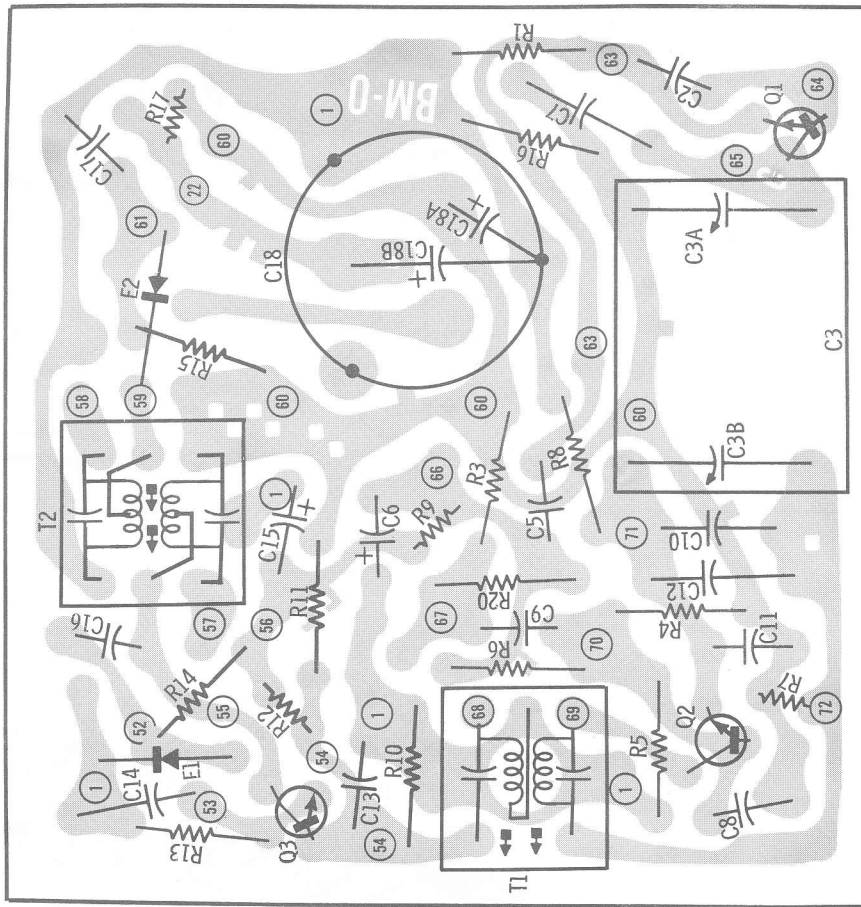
PLATED CHASSIS REFERENCE POINTS AND PARTS LOCATION
